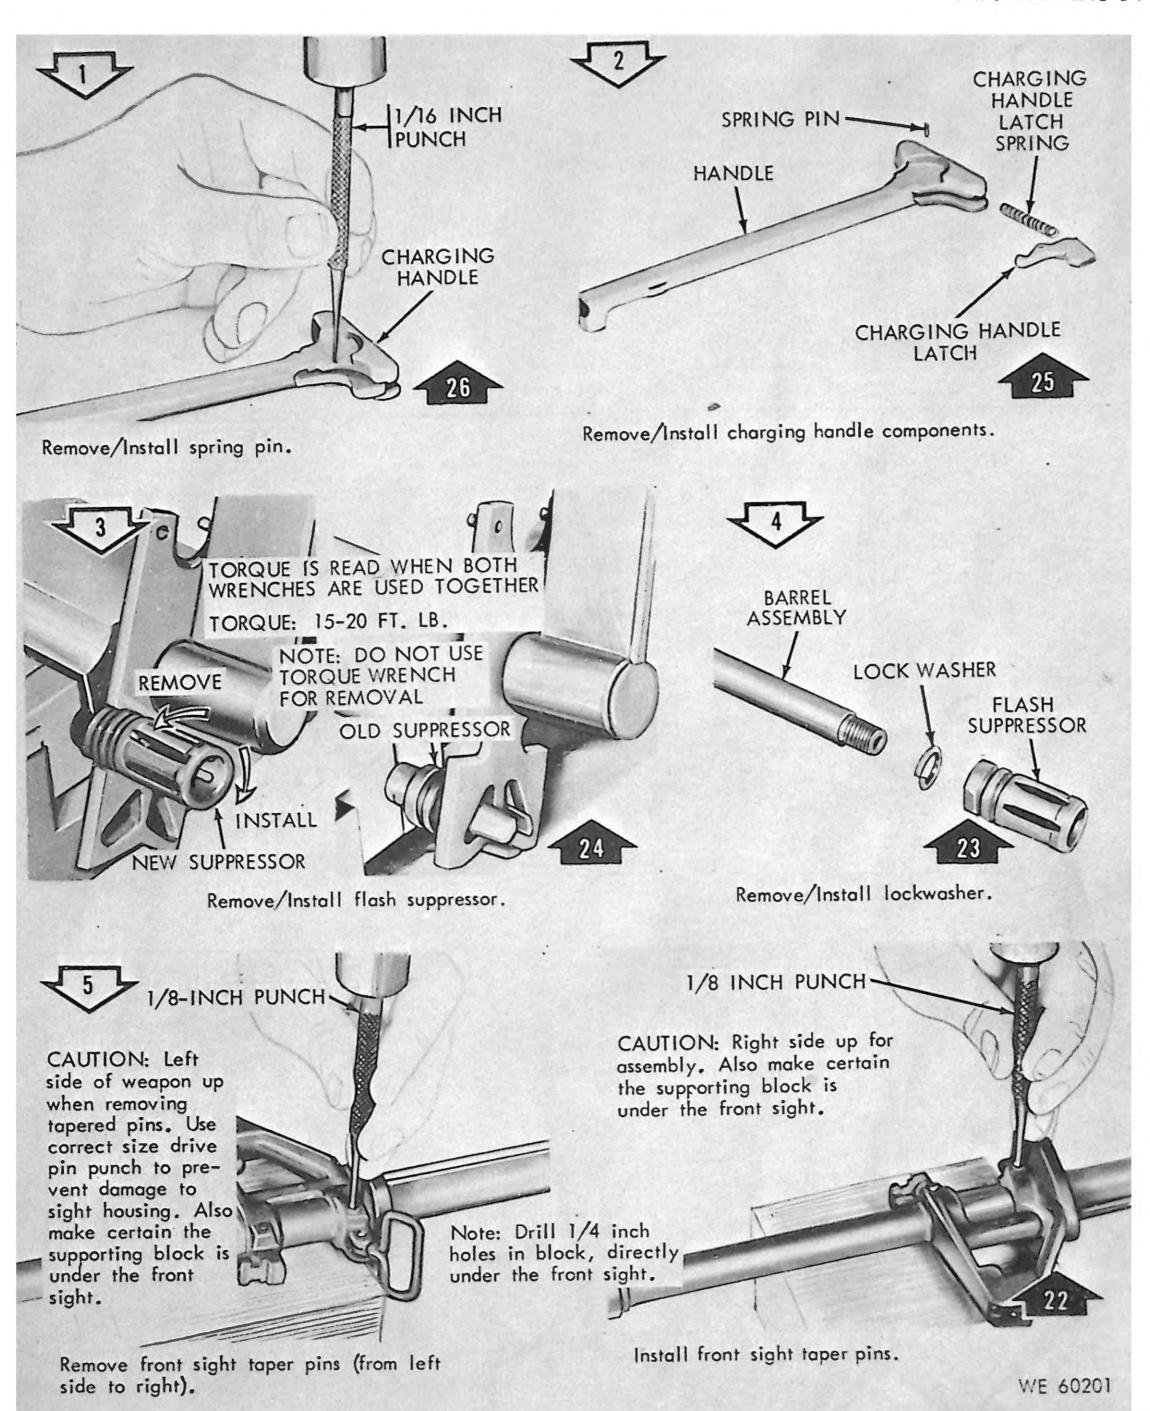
Disassembly/assembly of upper receiver group (1 of 6)
